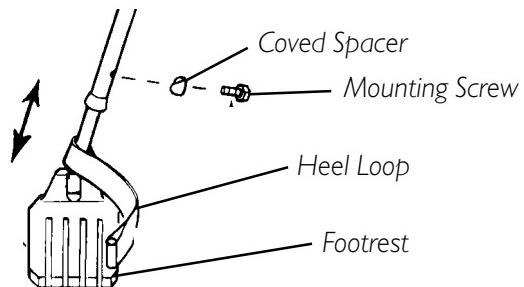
FOOTREST HEIGHT ADJUSTMENT - 60° MFX, 70° TAPER
